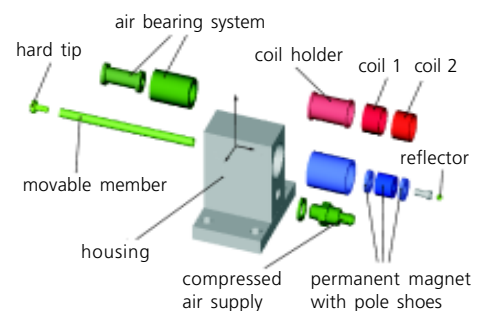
Exploded view of the electro-dynamic actuator with air bearing system /1/.
